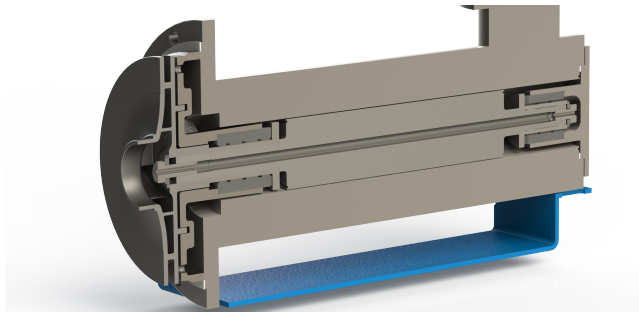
3D Model of the Teikoku 204TF1 pump created after disassembly and measurement.
